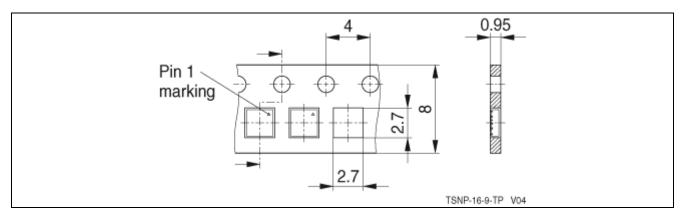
Packing Description of TSNP-16-9; Ø Reel: 180 mm, Pieces / Reel: 3000, Reels / Box: 1
